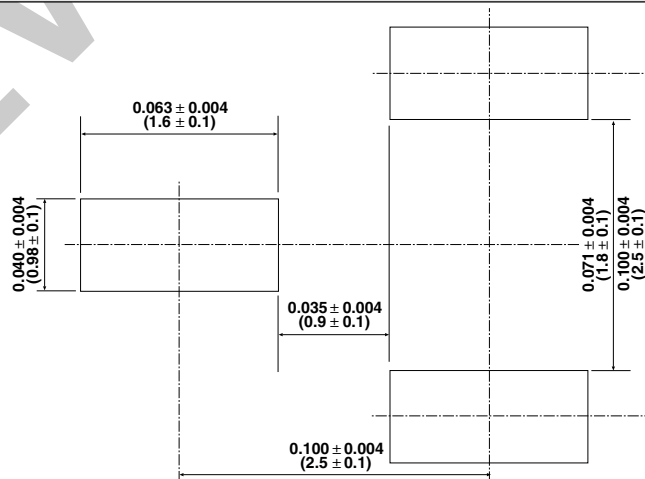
DIMENSIONS AND IMPRINTING
